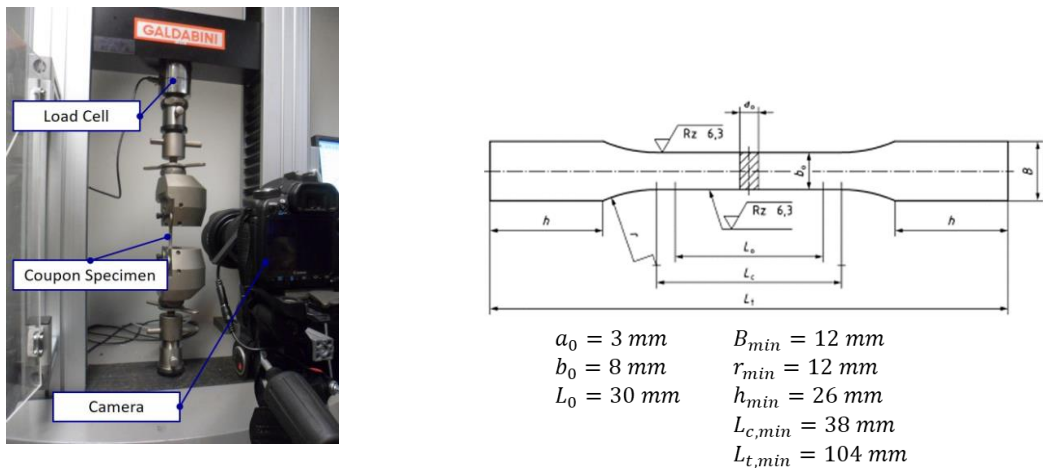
Test set-up (left) and used tensile test specimen geometry (right)
